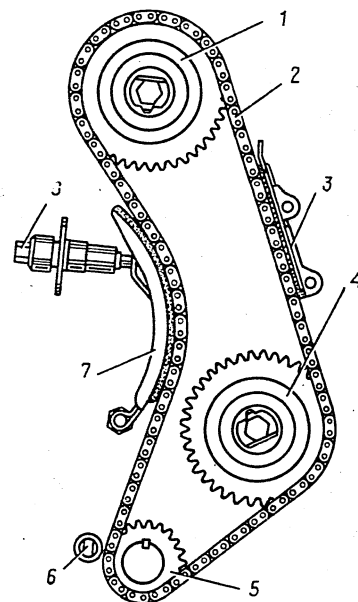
Camshaft and Accessory Drive Diagram:
